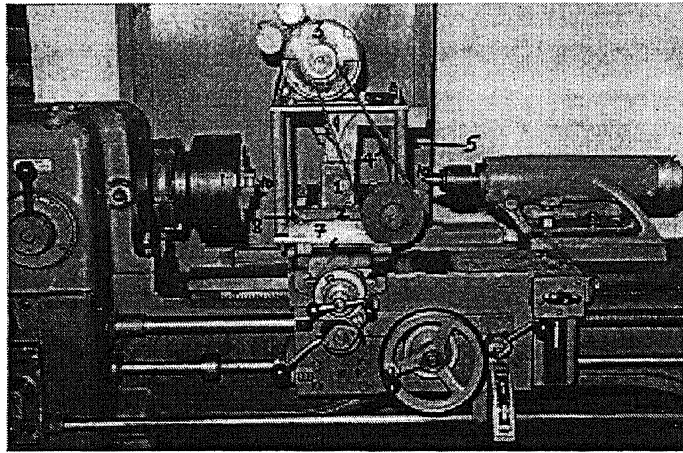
MAF setup mounted on lathe - 1:magnet, 2:carriage, 3:electric motor, 4:belt, 5:frame, 6:cross-slide, 7:rail, 8:wheel, 9:feeding system, 10:lathe centres [12]
